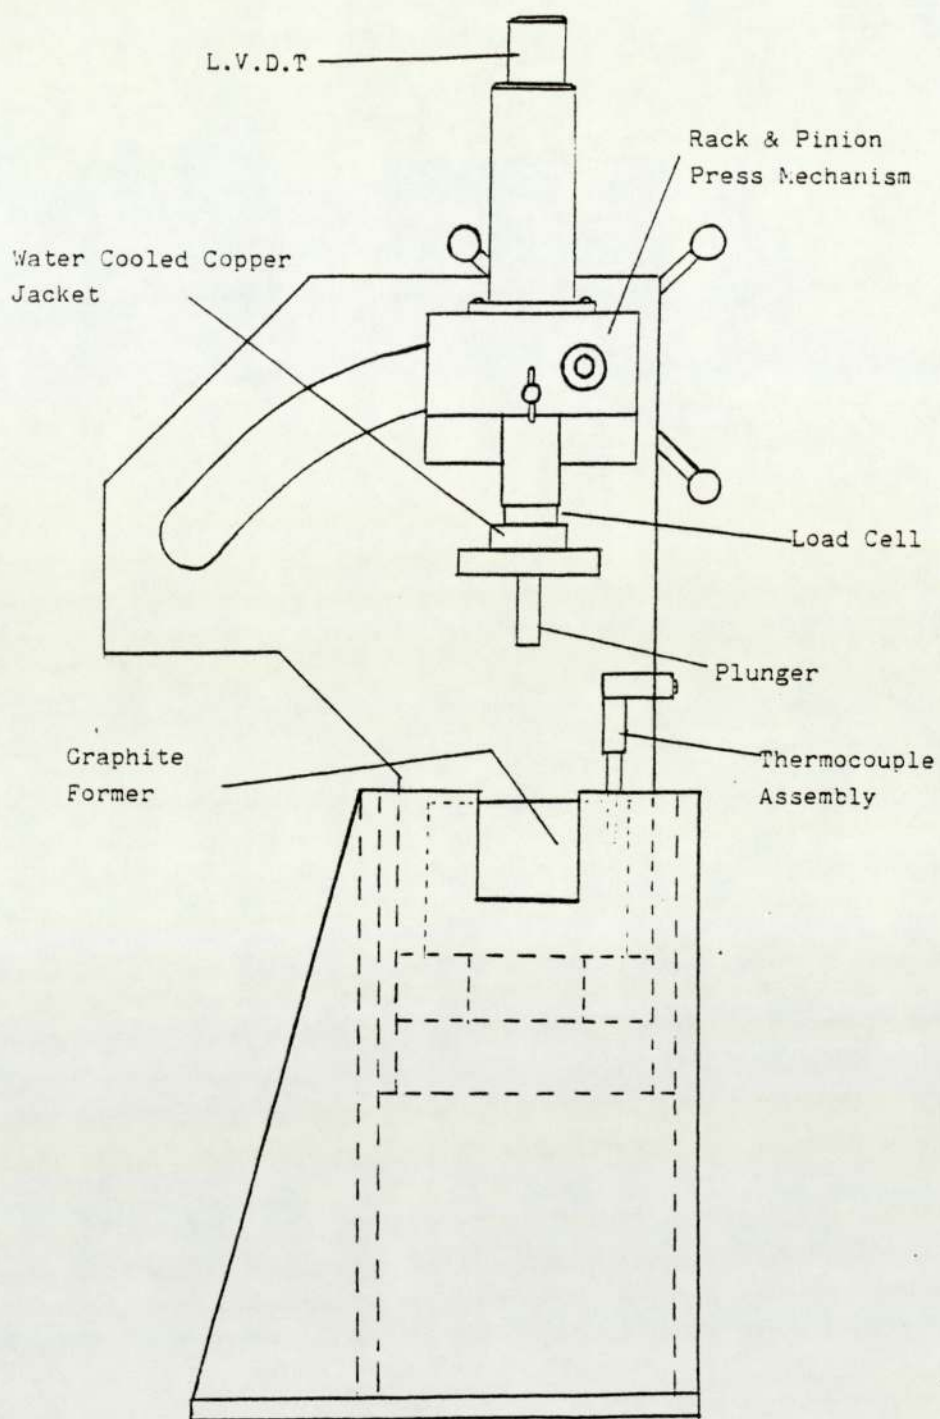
HELICAL FORMING UNIT - SIDE VIEW
